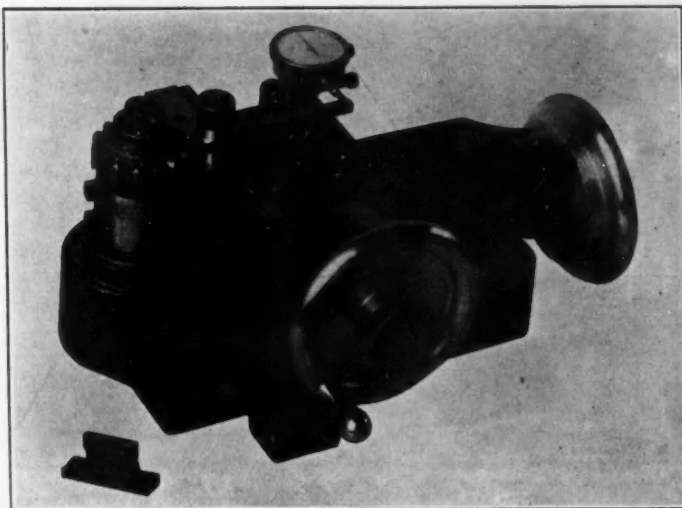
GEAR-TESTING DEVICE THAT HAS BEEN DEVELOPED TO CHECK THE INVOLUTE CURVE
